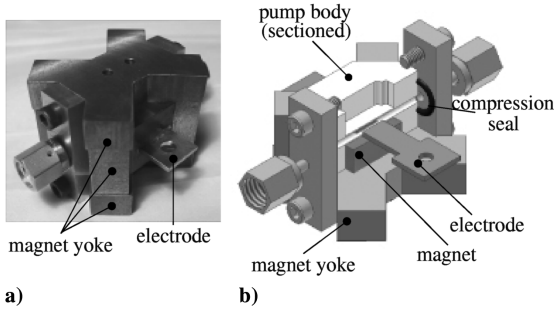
Bismuth EM pump: a) photograph of assembled pump, b) CAD drawing sectioned to reveal inner detail.
